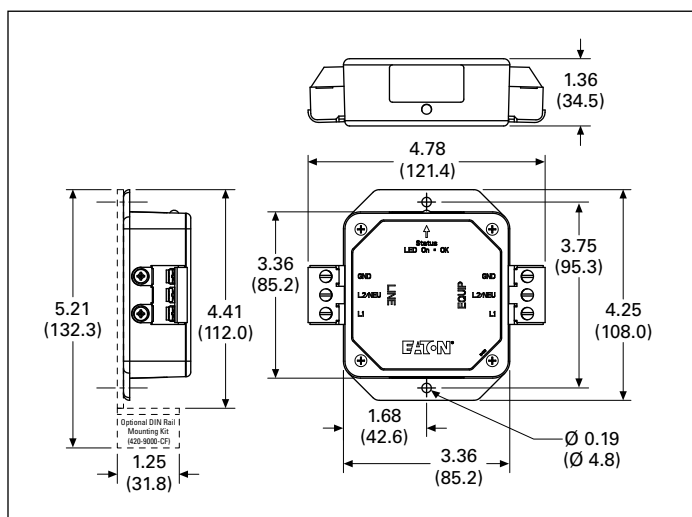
AGCFxxx10 Dimensions in Inches (mm)
